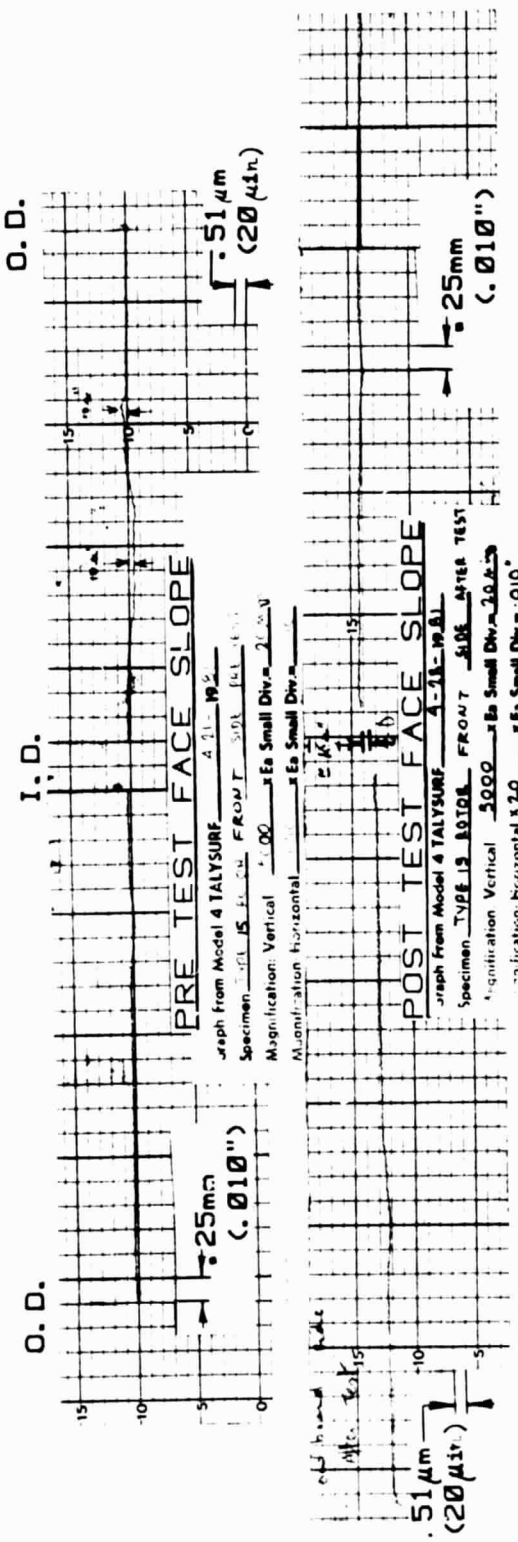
PROFILE TRACES OF THE FRONT SIDE OF THE ROTOR USED AS A MATING SURFACE DURING THE TESTS WITH THE CONED FACE BELLOWS TYPE SEAL.
